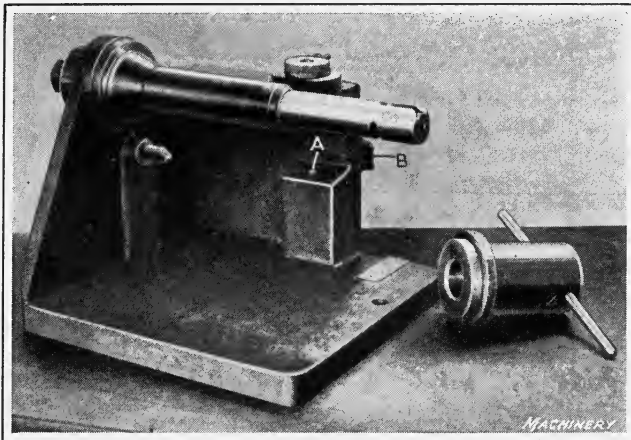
Equipment employed in performing Various Operations on Filler Hole
